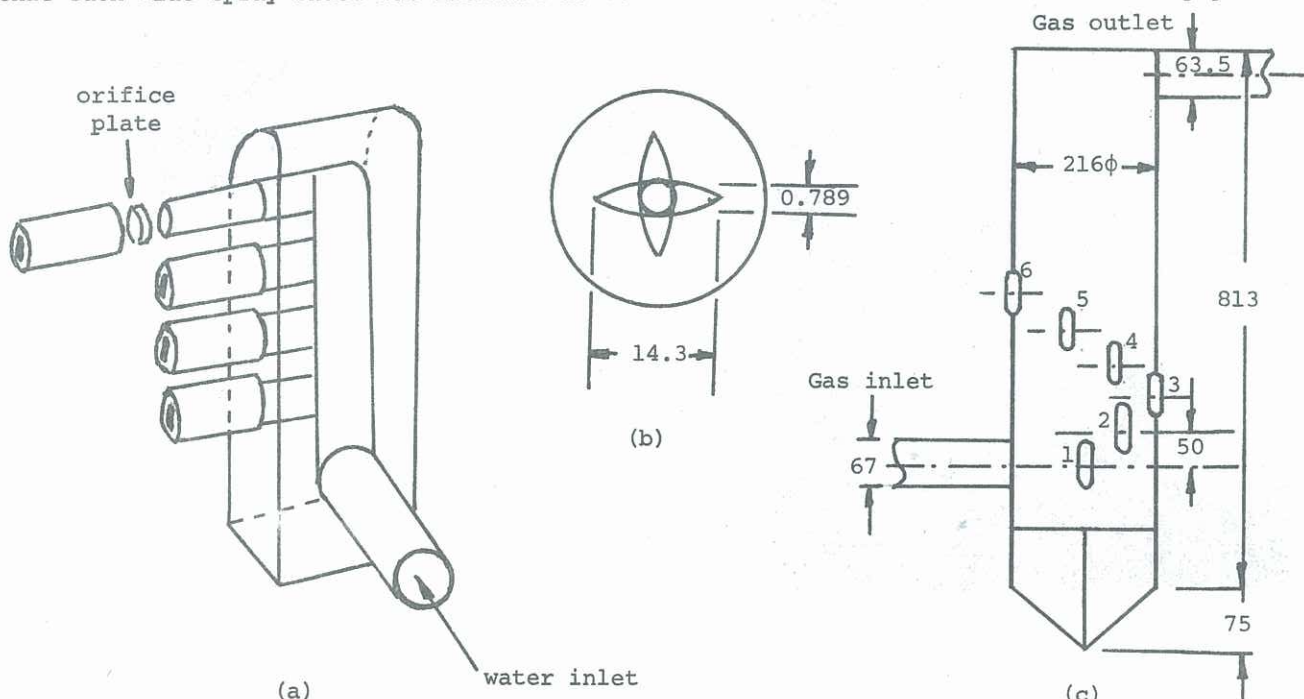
Model nozzle system. (a) Spray-box assembly. (b) Orifice plate. (c) Location in chamber. All dimensions in mm.
